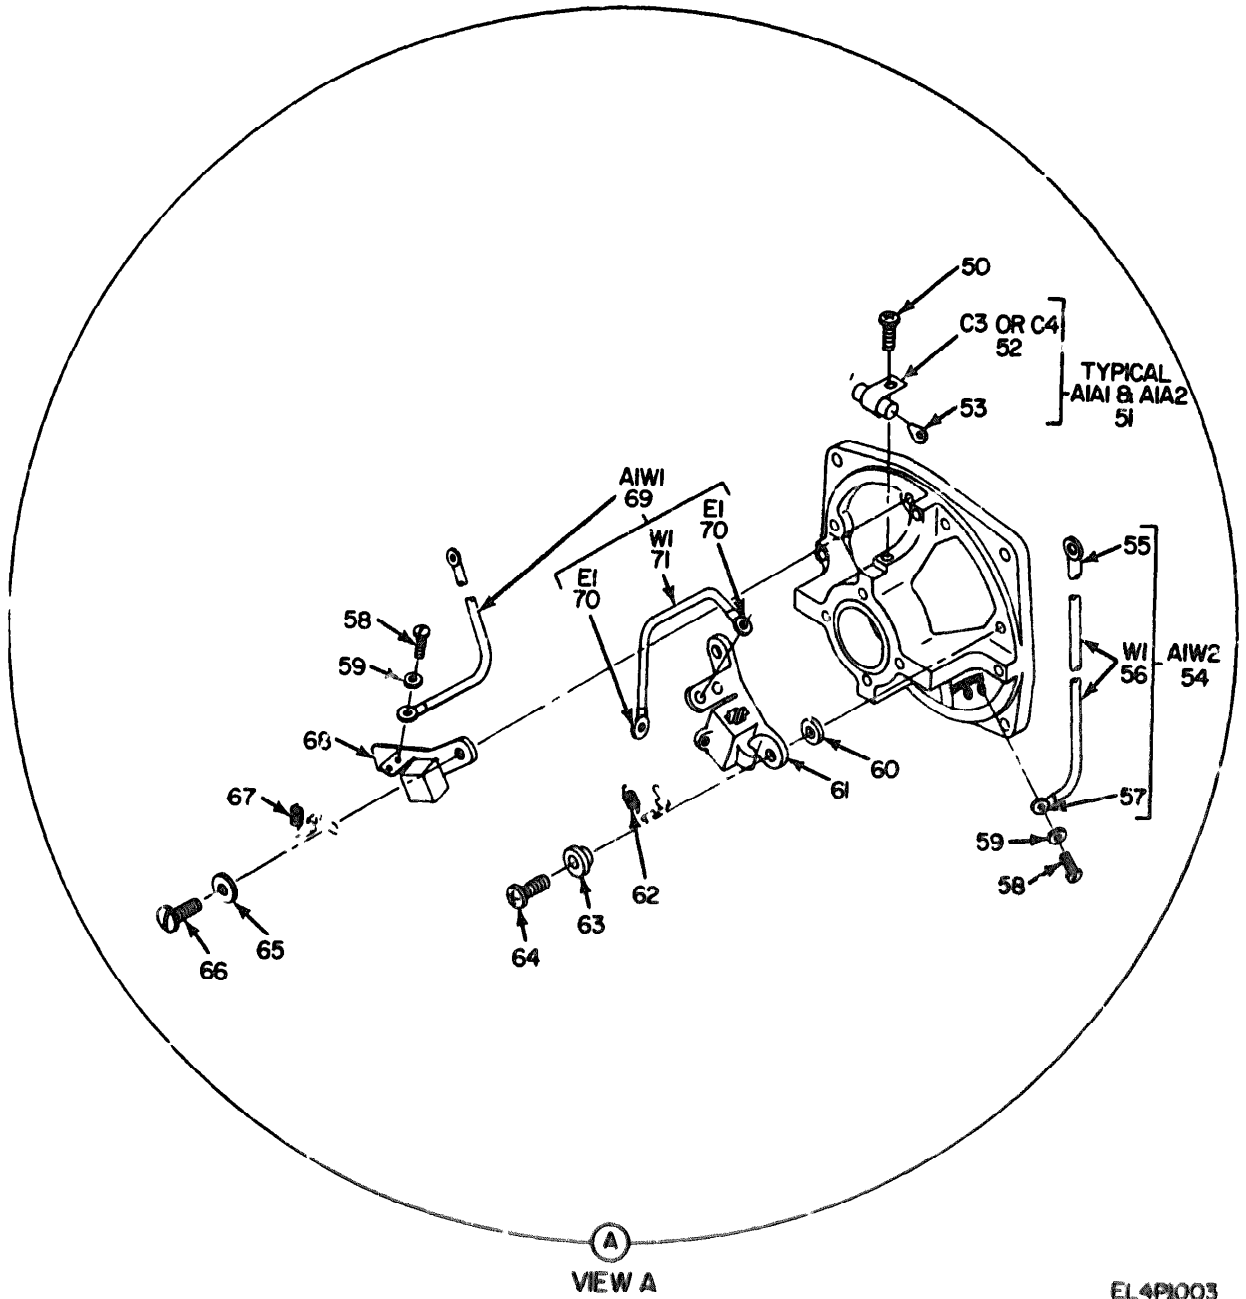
Motor Generator PU-733/A, Generator Section (Sheet 2 of 2).
